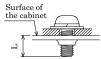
Physical Dimensions (PT-955SHX-DC6xxx)
